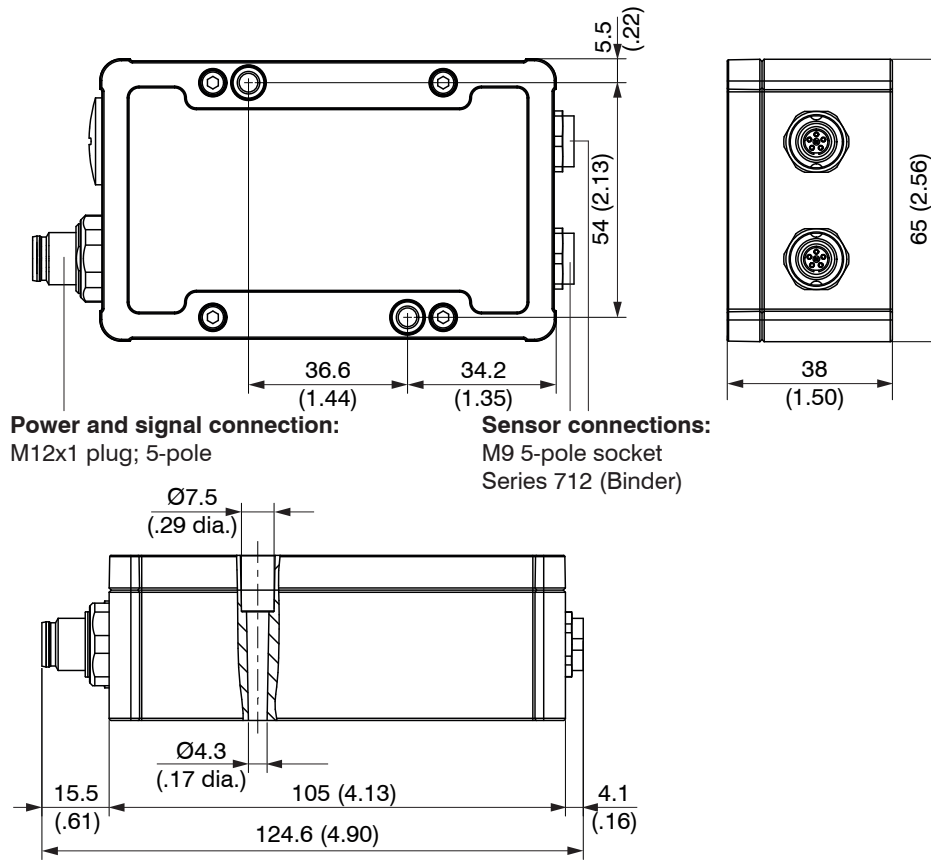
Dimensional drawing of MSC7802 controller, dimensions in mm (inches)
